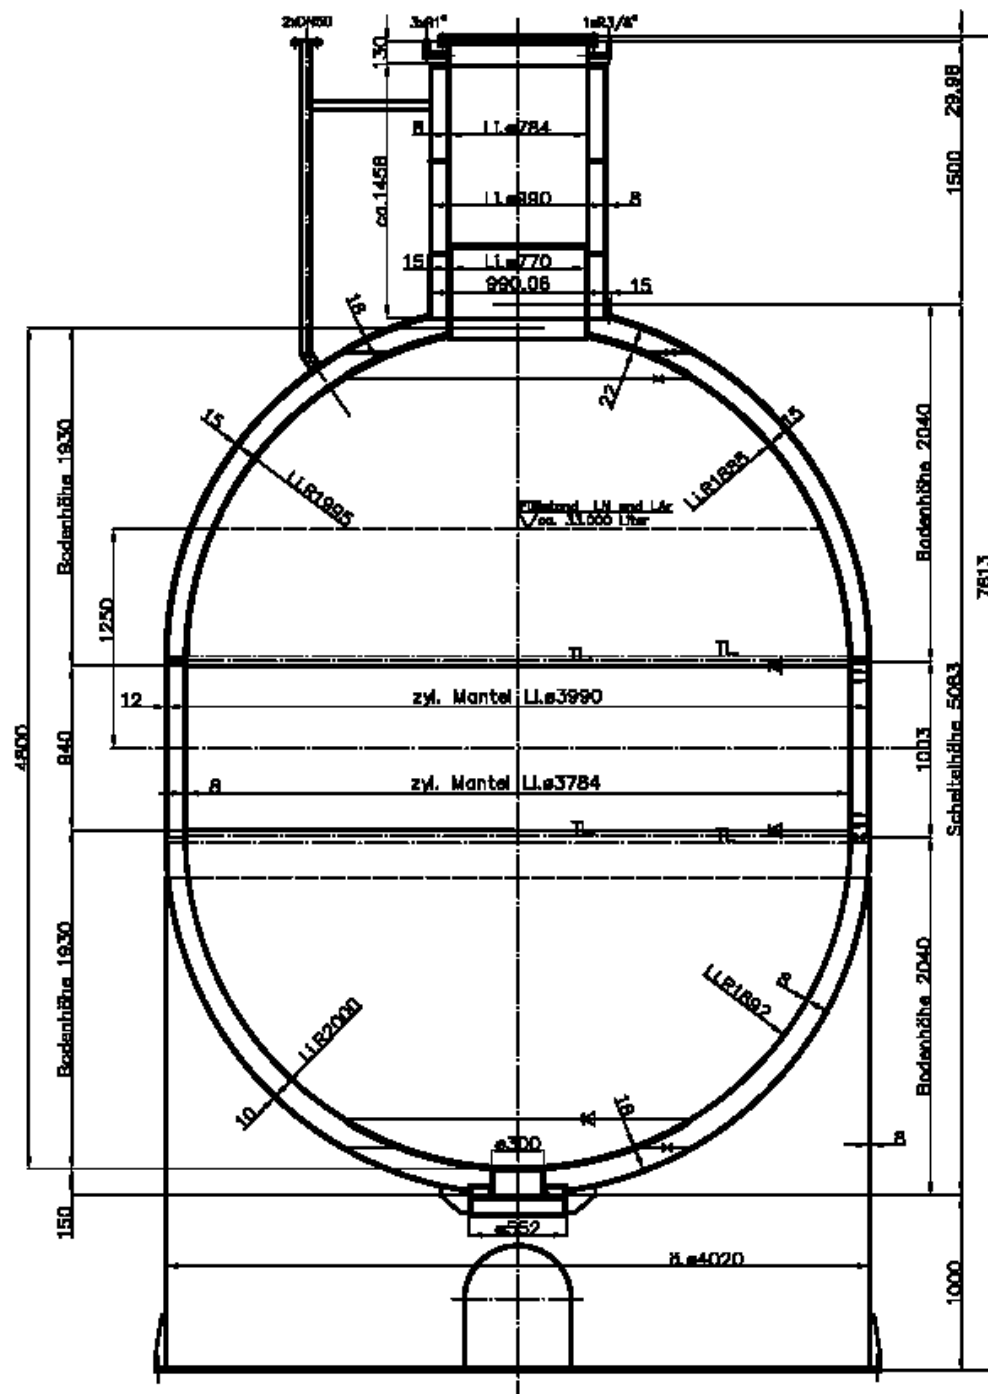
shows the cross section of the superinsulated cryostat designed in accordance to the German codes for cryogenic and pressure vessels using copper of the DIN type DHP R240 (formerly SF-Cu, material # CW024A, formerly 2.0090); the detailed production drawing is shown in Fig. 11. A summary of its characteristics is given in Table 2. The cryostat consists of two coaxial vessels which are built from hemispherical shells of inner radii of 1.89 m resp. 2.00 m and corresponding cylindrical centerpieces of about 1 m height. Both vessels have a coaxial cylindrical neck of 1.5 m length; a major part of it is made from stainless steel (1.4571) for achieving a high thermal impedance. The upper ends of the necks are connected to each other so that the inner vessel is suspended via its neck in the outer vessel without any further thermal contact. Additionally, the vessels are centered at bottom by a cylinder of about 30 cm diameter and 16.5 cm height and a corresponding socket that are welded to the inner and outer vessels, respectively. A cylindrical skirt made from 8 mm thick copper supports the outer vessel from the ground.
